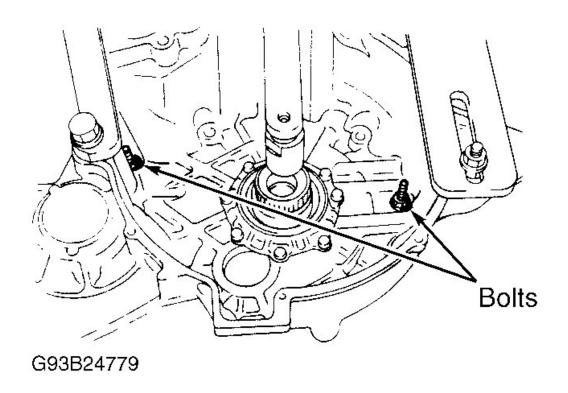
Installing Collar Bolts Courtesy of MAZDA MOTORS CORP.
